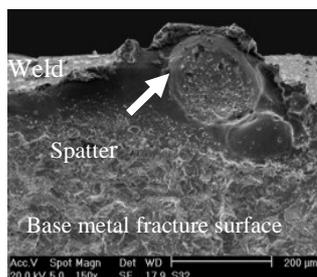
Fracture surface, showing spatter type cold lap
